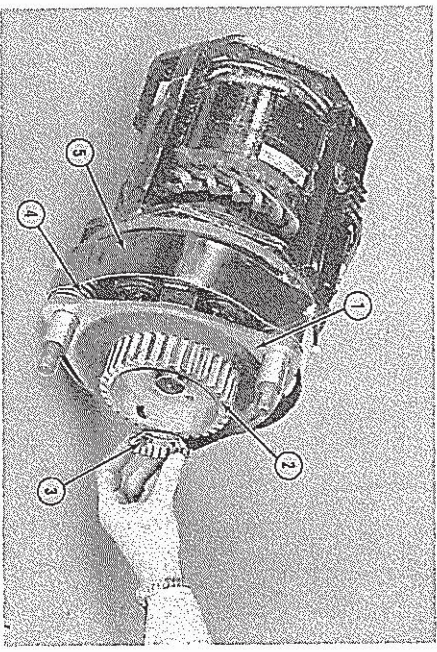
REMOVING BRAKE HUB LOCKNUT
